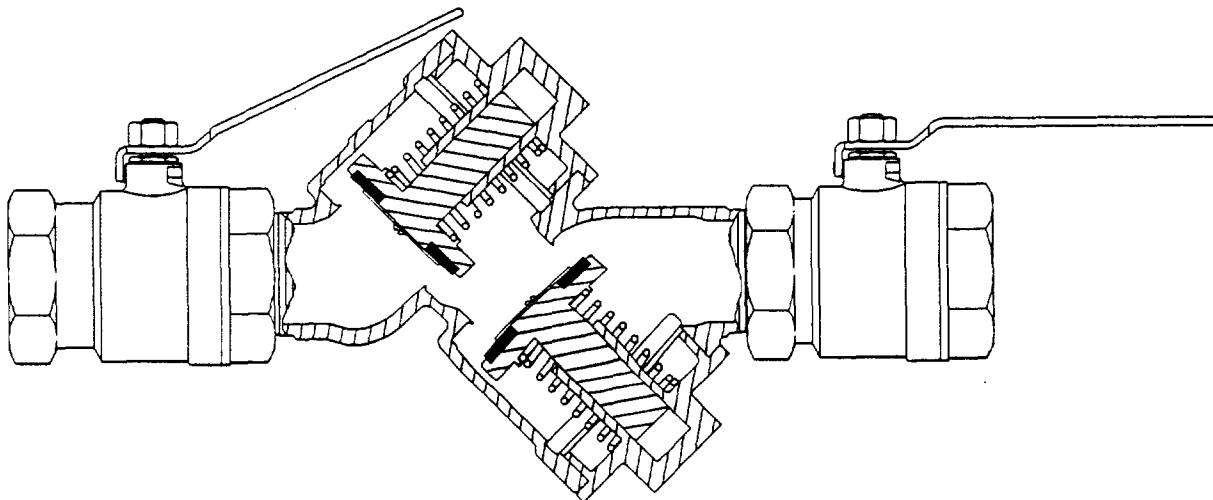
Cross Section Of Weighted Double Check Valve Assembly.
